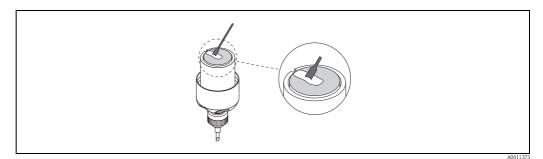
Coating the contact surfaces of the sensor with coupling fluid
